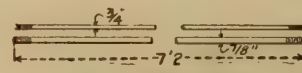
END PIECE BOTTOM PLATES.
